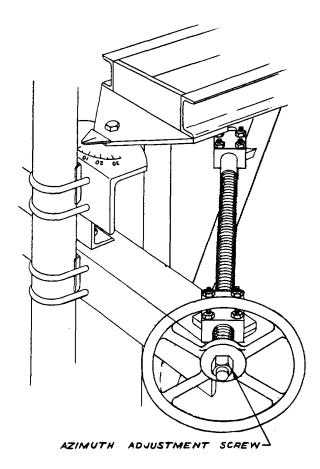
KS-16320, List 8 Azimuth Adjustment Screw Assembly in Operating Position
